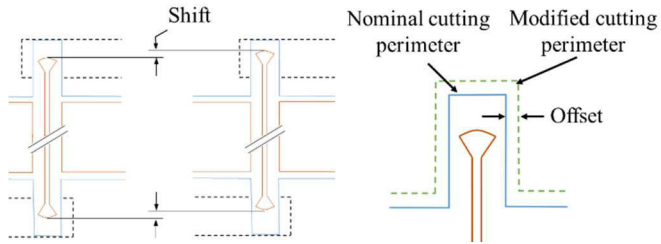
Illustration of i) a shift in the assembly intentionally introduced and ii) the cutting offset that determines the assembly clearance.
